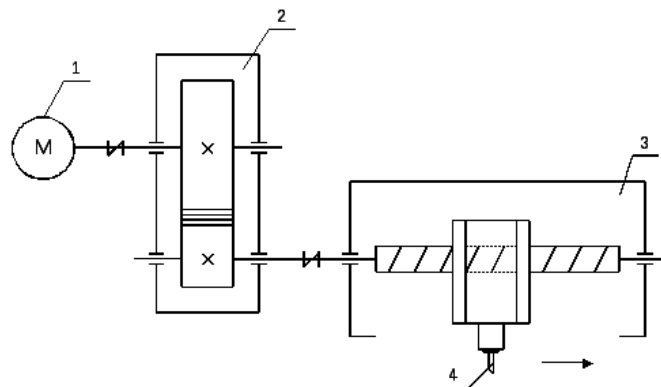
Kinematic flow diagram of a metal-cutting machine
